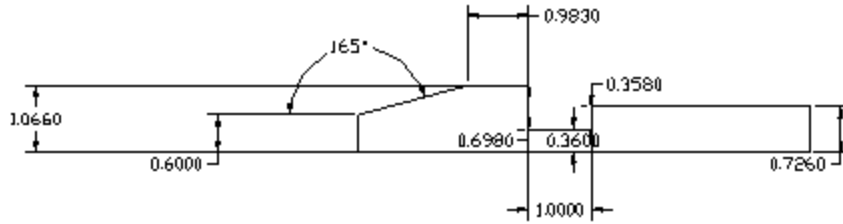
CAD drawing of the front view of the base of the frame (units in inches)
